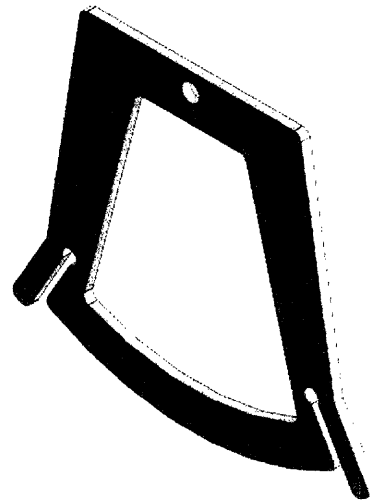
Sector made from polycarbonate. Flexures provide preloading. Part drawing is generated in SolidWorks and part machined in water jet cutter.
